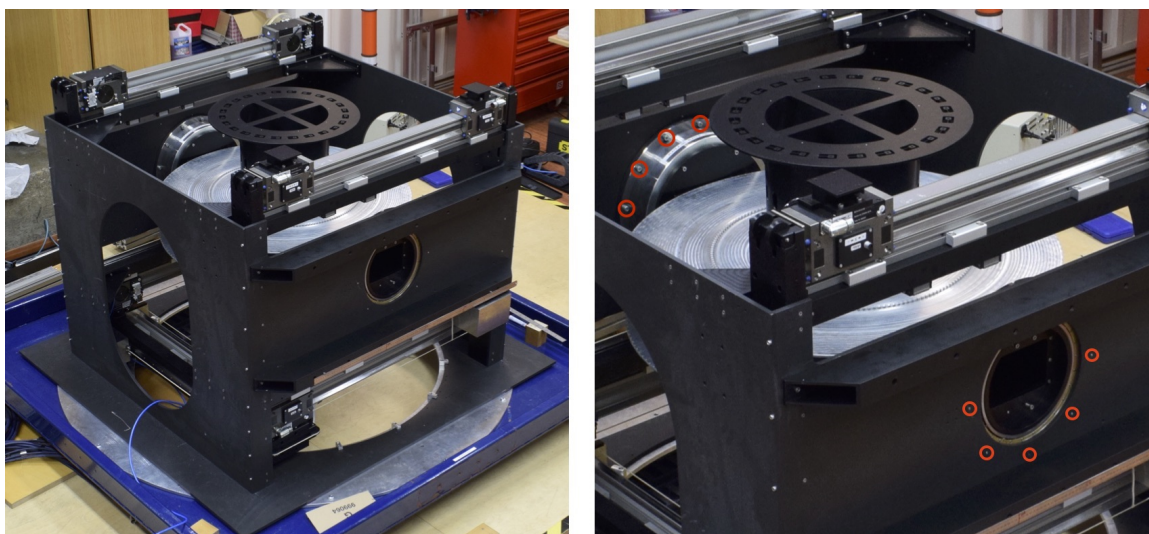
The tumbler is installed. The zoom in shows a clearer view of the screws that provide a vertical adjustment opportunity. The orange circles are around the visible screws, on the bearing end (this side) and the motor end (opposite side).
